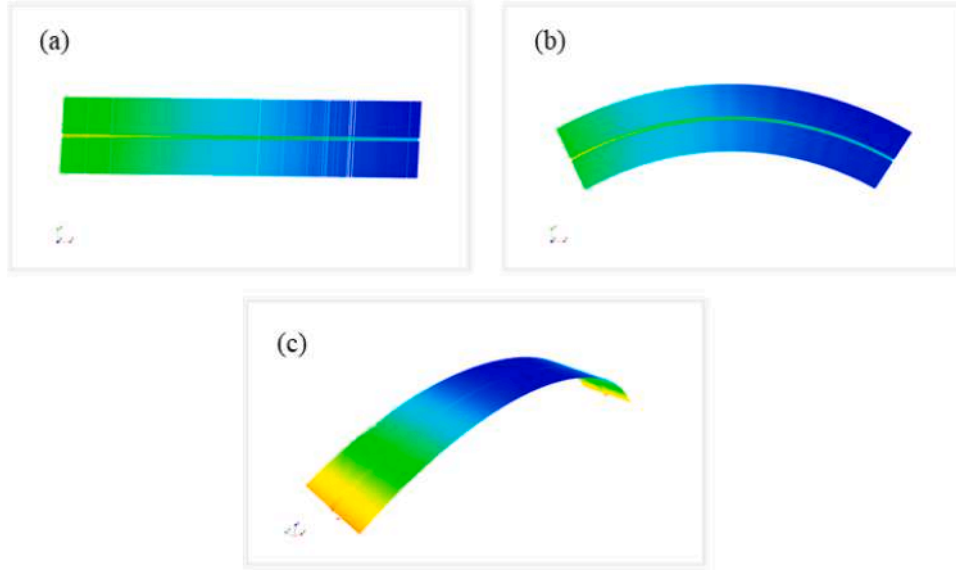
Point cloud models for various types of workpieces (a) Linear weld seam (b) Curve weld seam (c) 3D curve weld seam.
